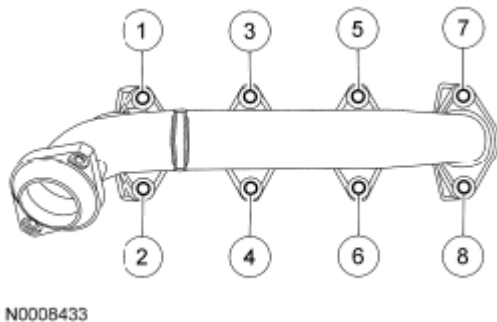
Identifying Bolt Tightening Sequence Of Exhaust Manifold
